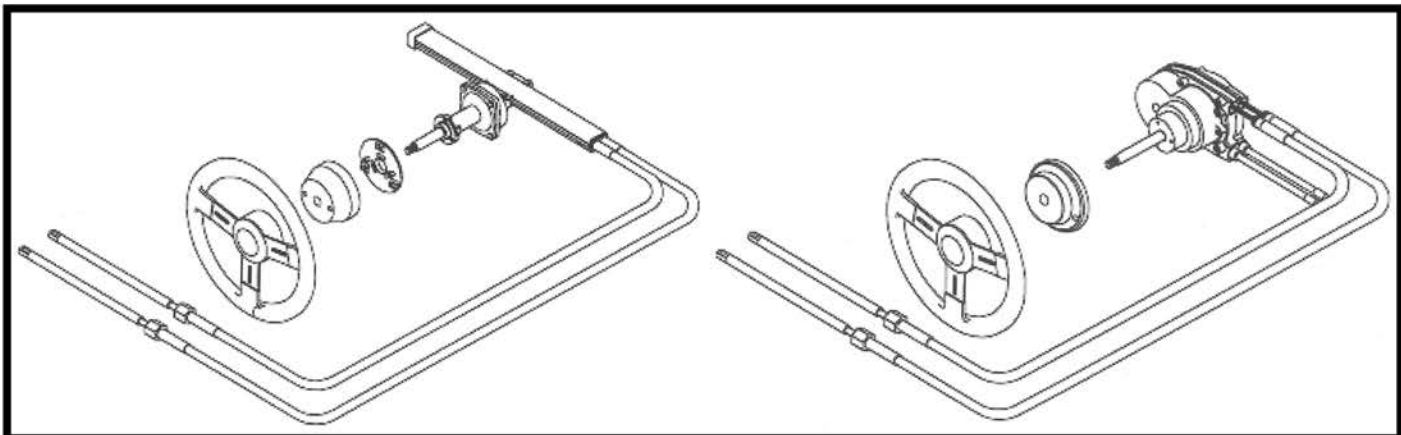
GEAR RACK AND ROTARY HEAD CONFIGURATIONS
